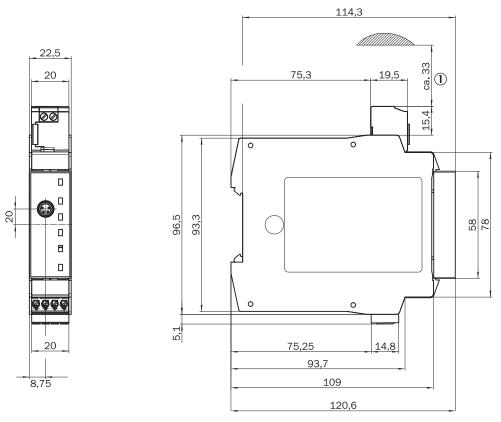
Dimensional drawing SC-FS-CPUx (mm)
